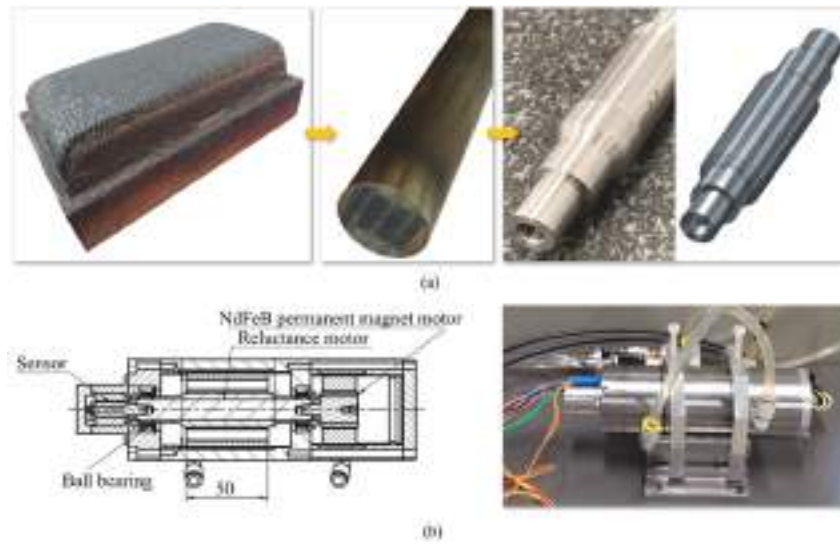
Fabrication steps of the bi-metallic rotor produced using DED technology (a) and the developed test bench for testing the high-speed synchronous reluctance motor (b).
